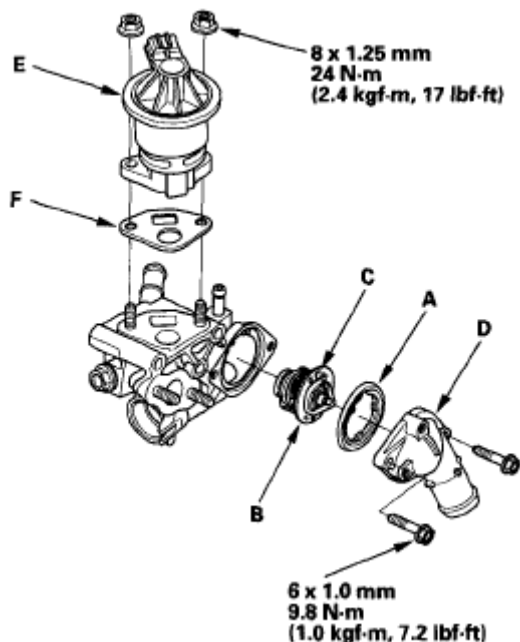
Identifying Thermostat, Pin And Thermostat Cover With Tightening Torque
